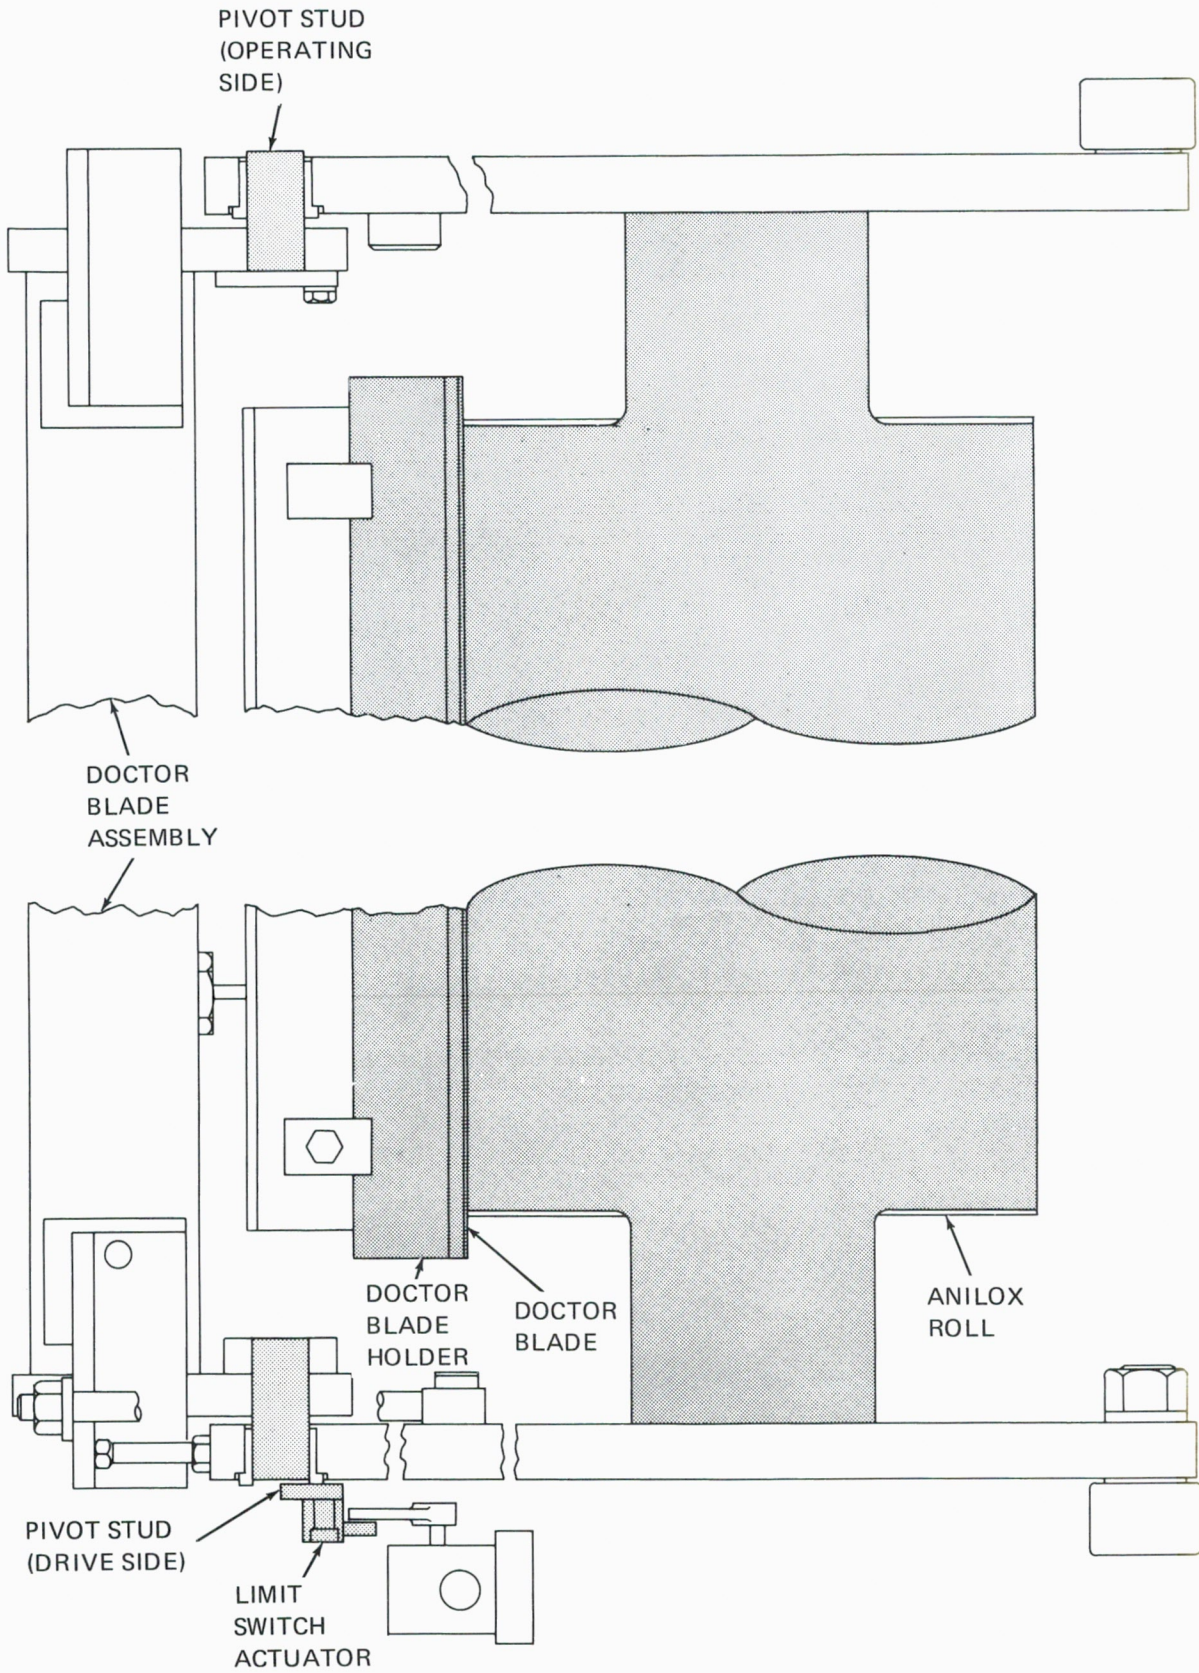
REMOVING DOCTOR BLADE ASSEMBLY
